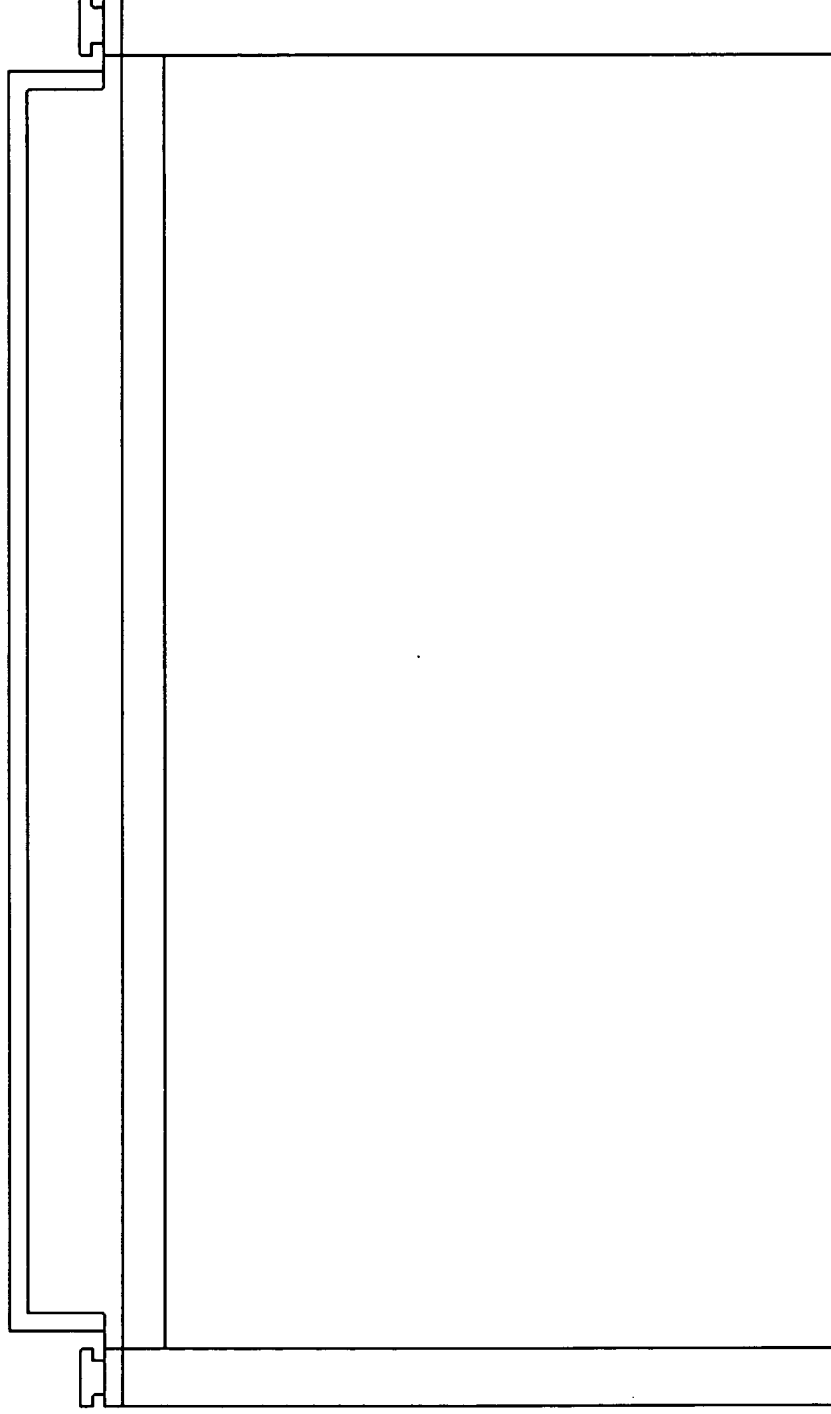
B: Top view of the left end of a ceiling frame (40 foot high cube collapsible cargo container)
